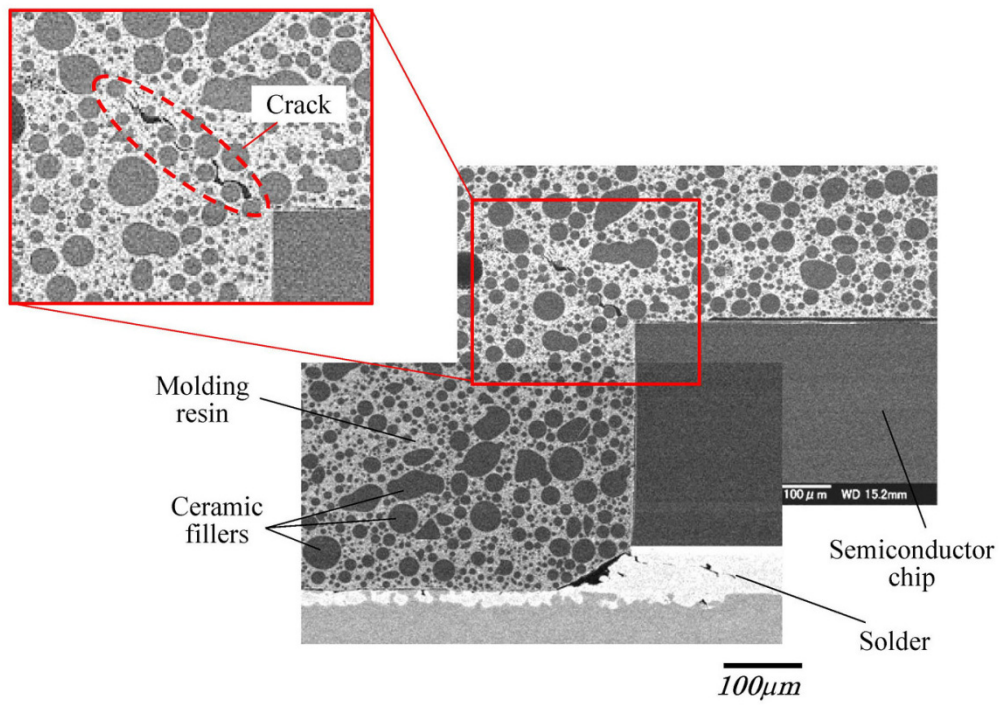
A thermal fatigue crack of epoxy molding resin found in a semiconductor package after thermal cycles.
